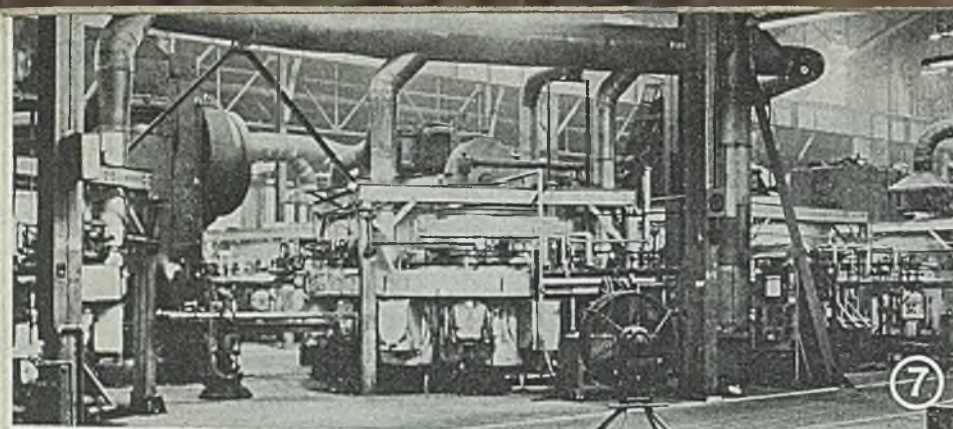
Two furnaces with mechanical manipulator are used to supply the press used for coining edges of large tip of the blade
